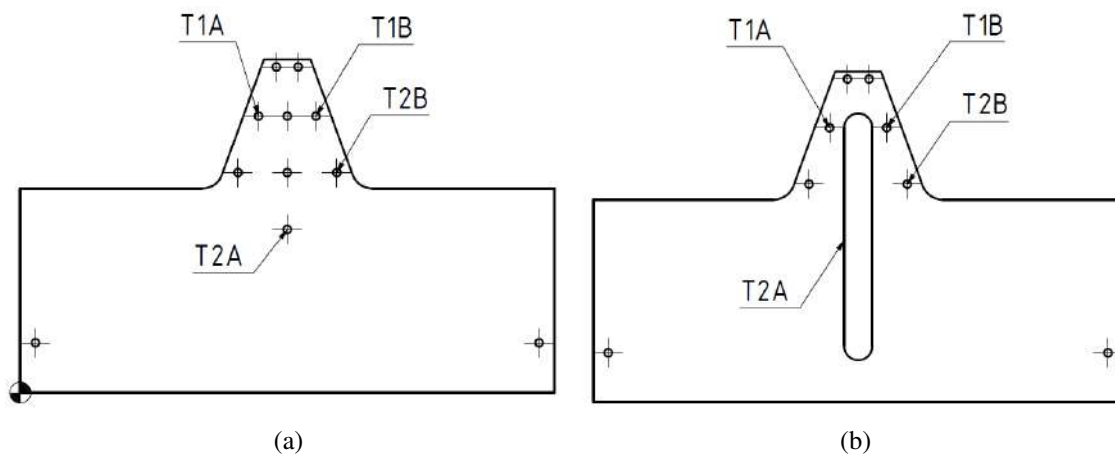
Drawings of (a) standard tooth (b) and hybrid Tooth with bore holes for thermocouple.
